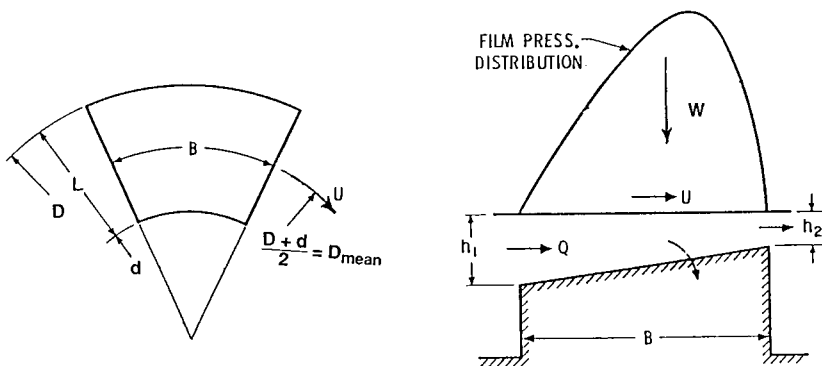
Sector for tapered land thrust bearing.
